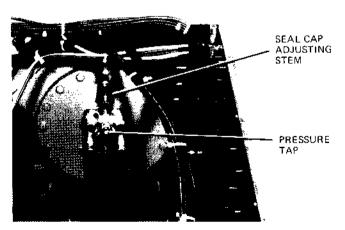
SUCTION STOP VALVE — COMPRESSOR INSTALLED IN UNIT
